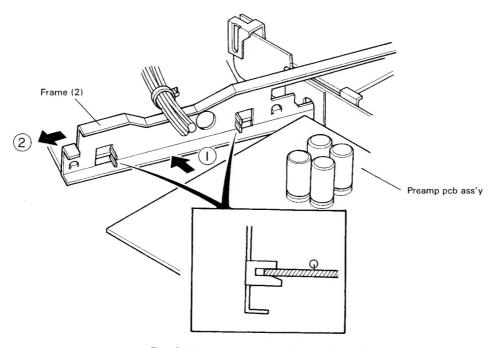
How to remove switch pcb ass'y (X13-2980-00) (2)
